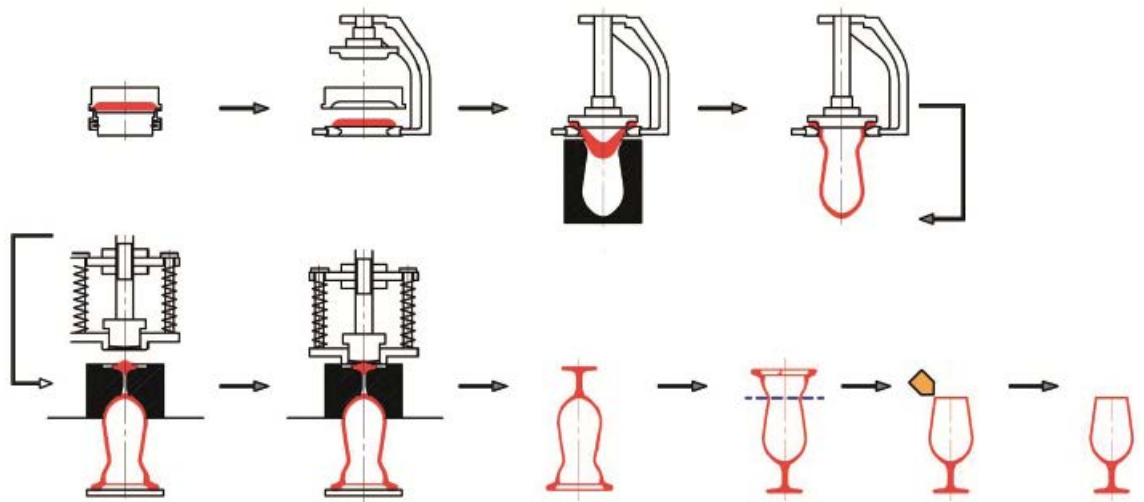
The main steps of wine glass production: blow molding → preparing and pre-forming the molten glass gob → insertion into the machine → blowing (an air jet expands the glass to fill the mold) → removal of the glass from the machine → pressing → feeding the molten glass droplet for stem and base plate → pressing the stem and the base plate → removal from the machine → separating → cutting the glass → polishing the mouth rim → finished glass
